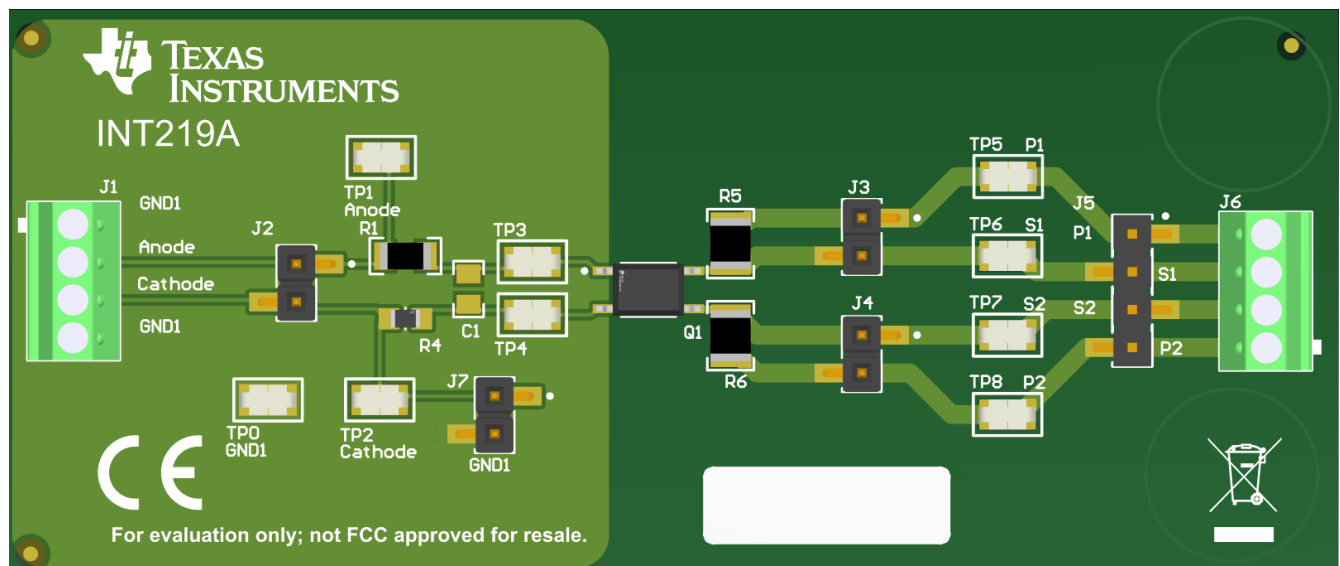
Layout Example of ISOM8600 With a 2-Layer Board
